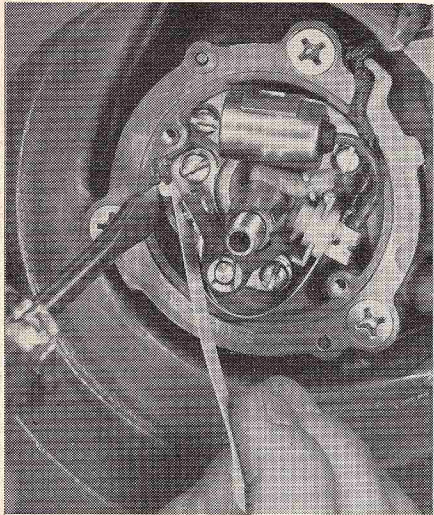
View showing magneto backplate, condenser and breaker point assembly. A pry slot is provided to facilitate breaker point adjustment.
